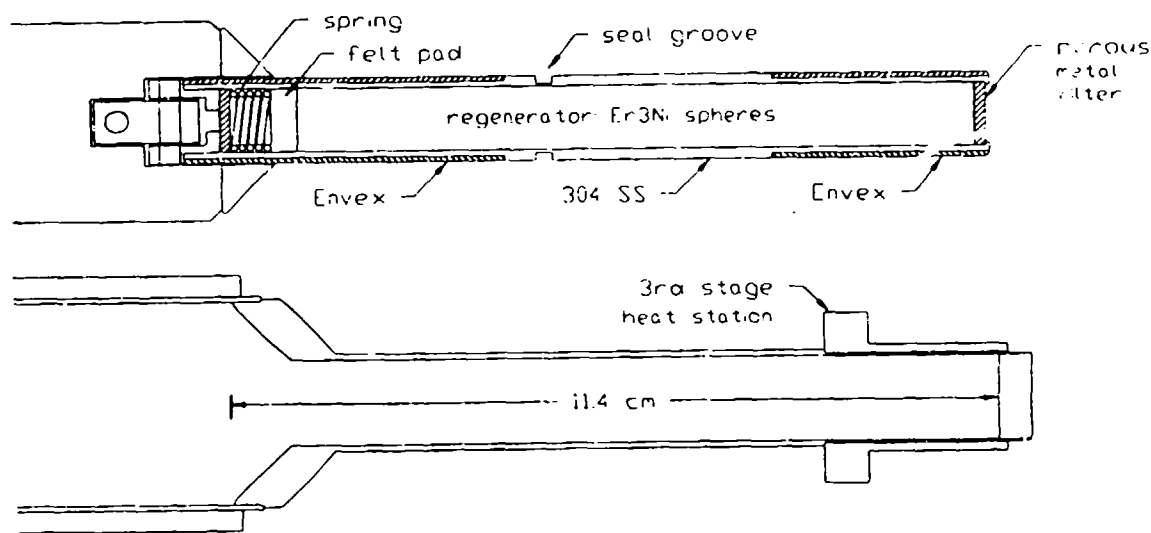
Cross sectional views of a 3rd stage cylinder and typical displacer.
